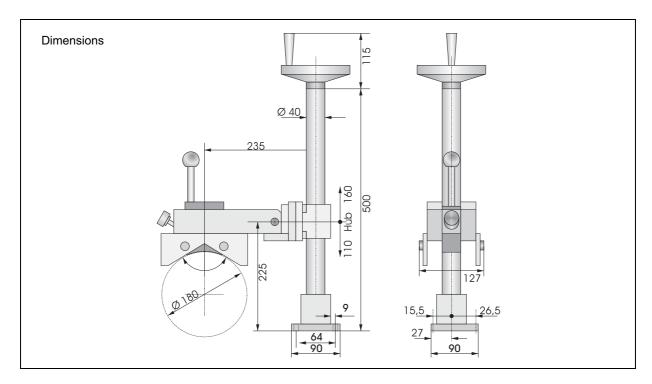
Segment coil holder SH 180 2.870.01-2301 and Segment coil yoke LSP 180 2.870.01-2201 with height adjustment
